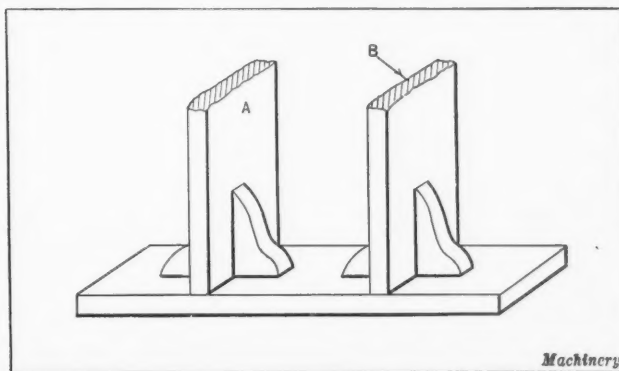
Casting with Projecting Parts that offer Resistance to Shrinkage
